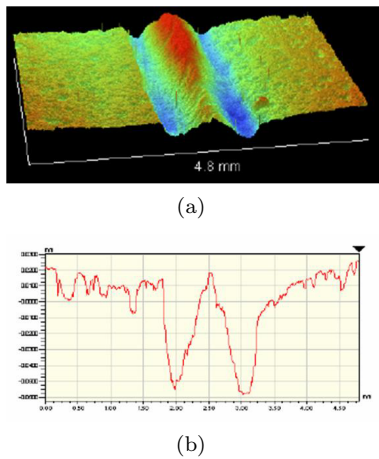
Profile of laser welded part of electrical steel sheet; 3 dimensional measurement(a) and depth profile(b)
